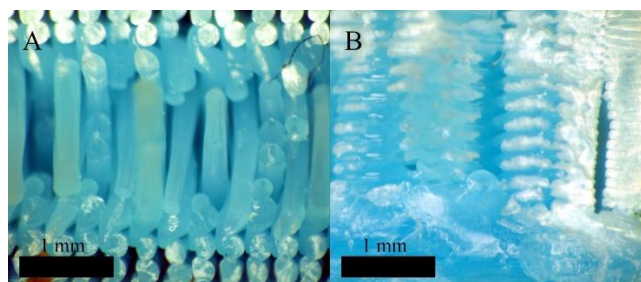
A- Test specimen with a layer height of 0.3 mm and filament width 0.3 mm. Test specimen 9_2. Microscopic photography, B- Test specimen with layer height 0.1 mm and filament width 0.6 mm. Test specimen 21_3. Microscopic photography.
